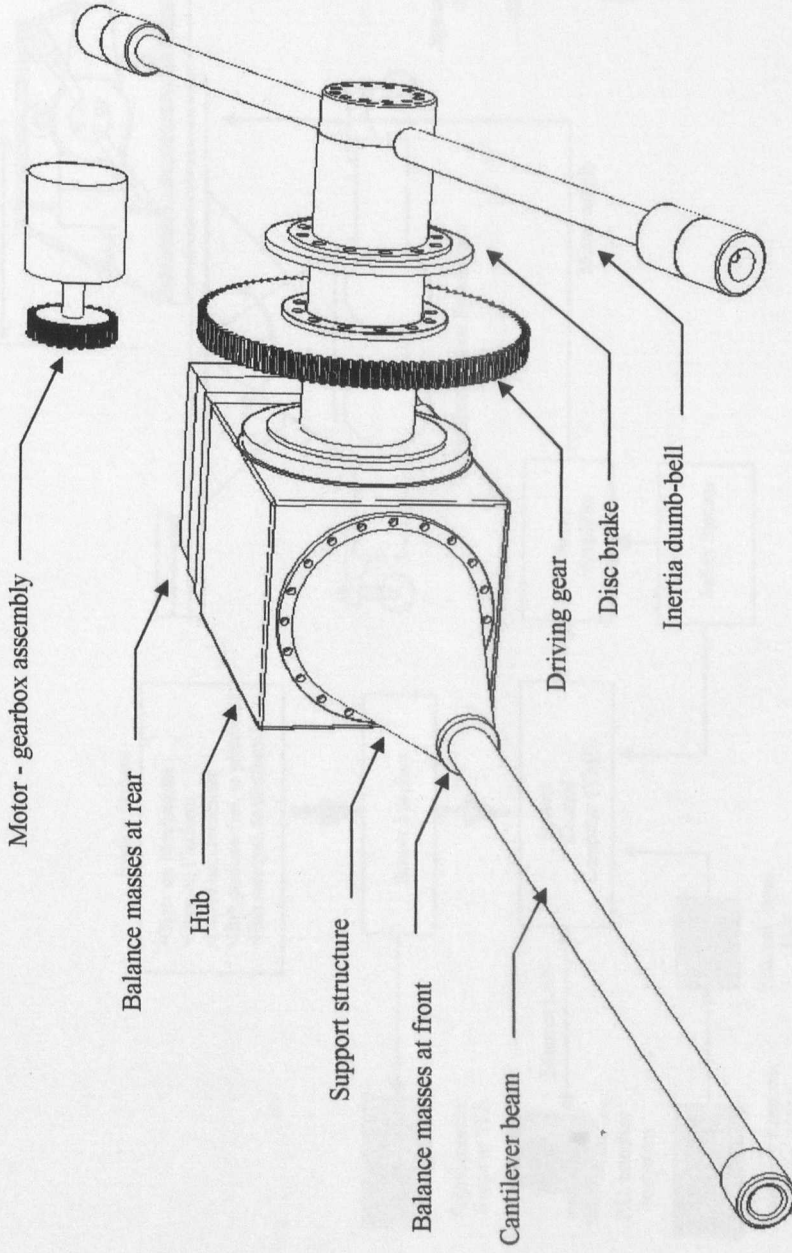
Schematic of the cantilever mechanism. The gap between motor - gearbox assembly and driving gear, shown separated for clarity. The balance masses at front also not shown for clarity.
